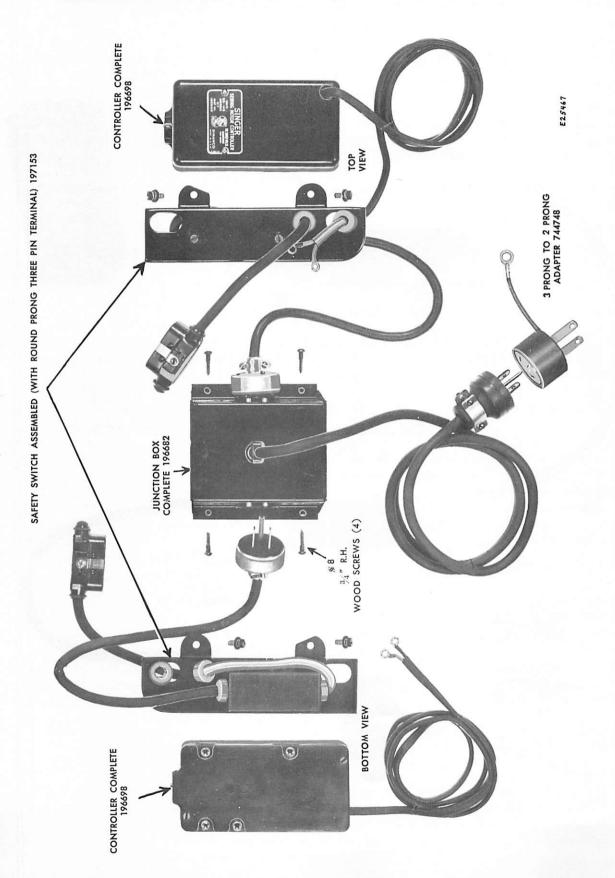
Grounded Safety Switch Outfit No. 196688 For 409, 411, 412 and 413 School Tables
